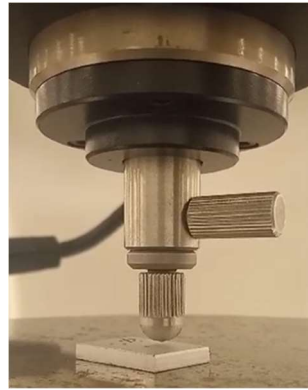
Hardness testing of extruded aluminum sample using steel ball indenter.
